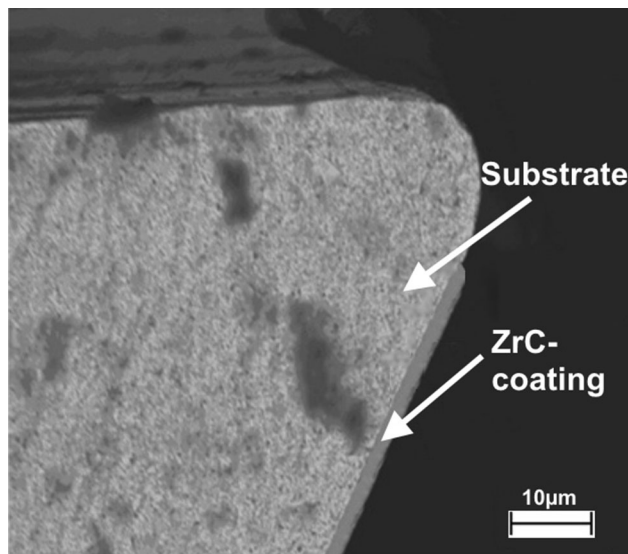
SEM image of fracture of edge knife coated ZrC/Ni-UDD after pilot tests when cutting laminated chipboards
